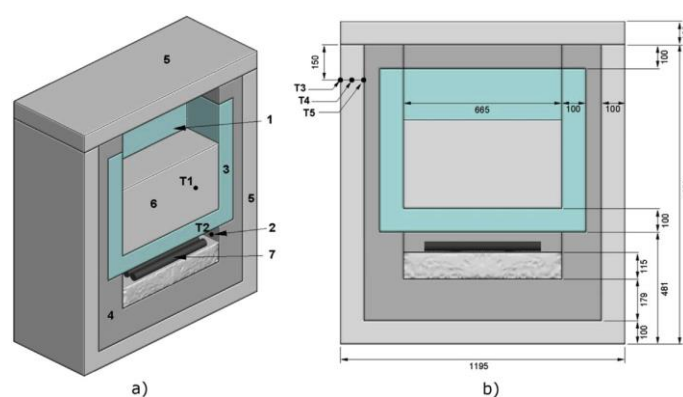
a) Sectional view of the aluminum holding furnace (1-holding chamber, 2-heating chamber, 3-layer of refractory material A, 4-layer of refractory material B, 5-layer of refractory material C, 6-aluminum load, 7-electrical resistances, T1-thermocouple in load, T2-thermocouple in heating chamber); b) main dimensions in mm (T3 to T5-thermocouples in walls)
